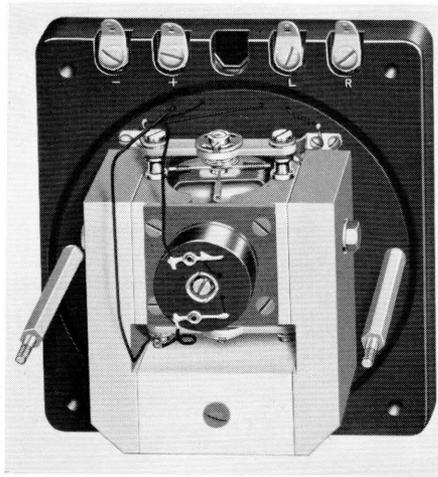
Permanent Magnet—Movable Coil Integrating Relay Assembly.
